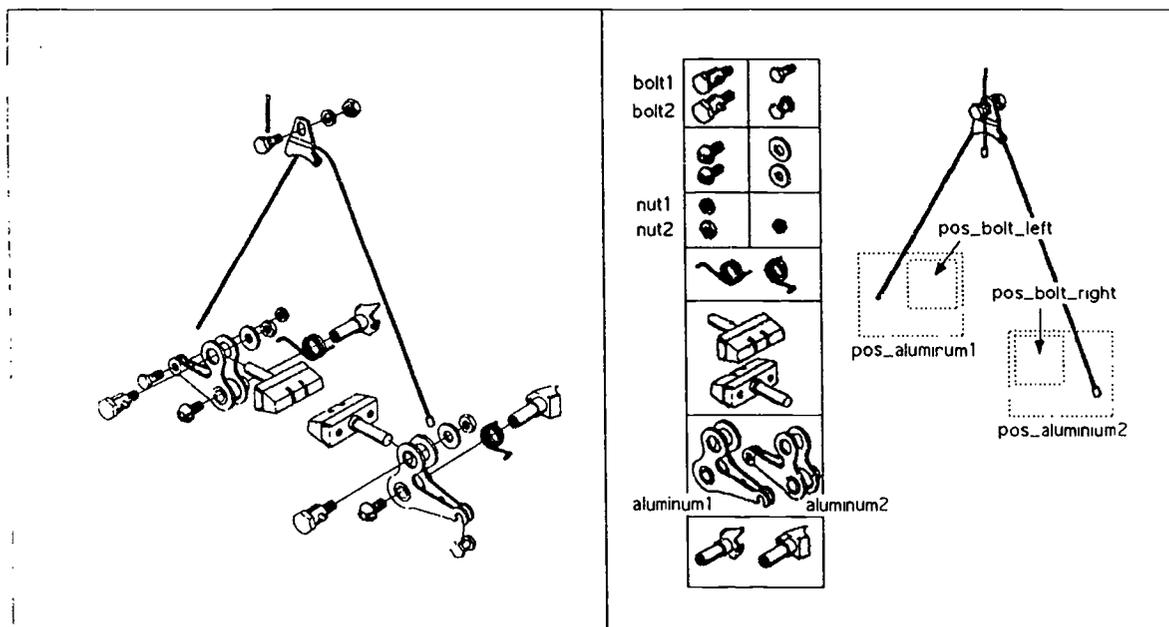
This is an example of a bicycle brake that has to be assembled by snapping each part with the mouse and dragging it to its corresponding position on the right side of this figure.
